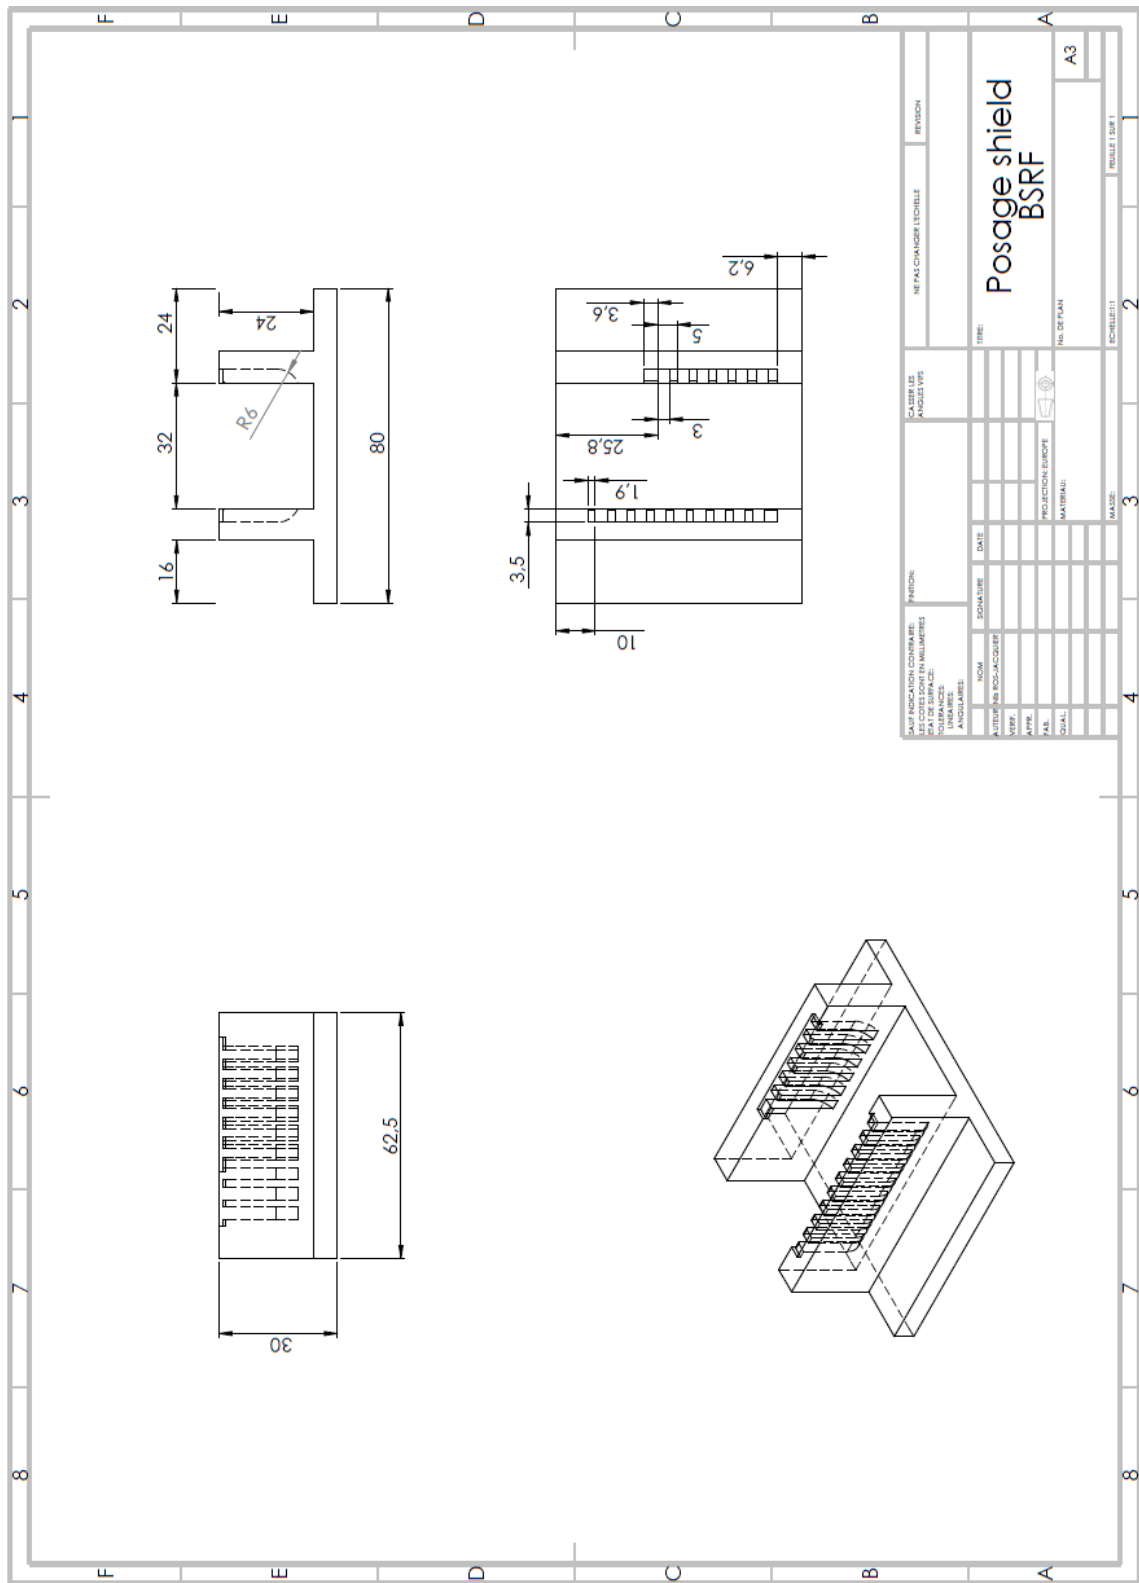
Full technical drawing of the custom fixture designed for bending tests.
